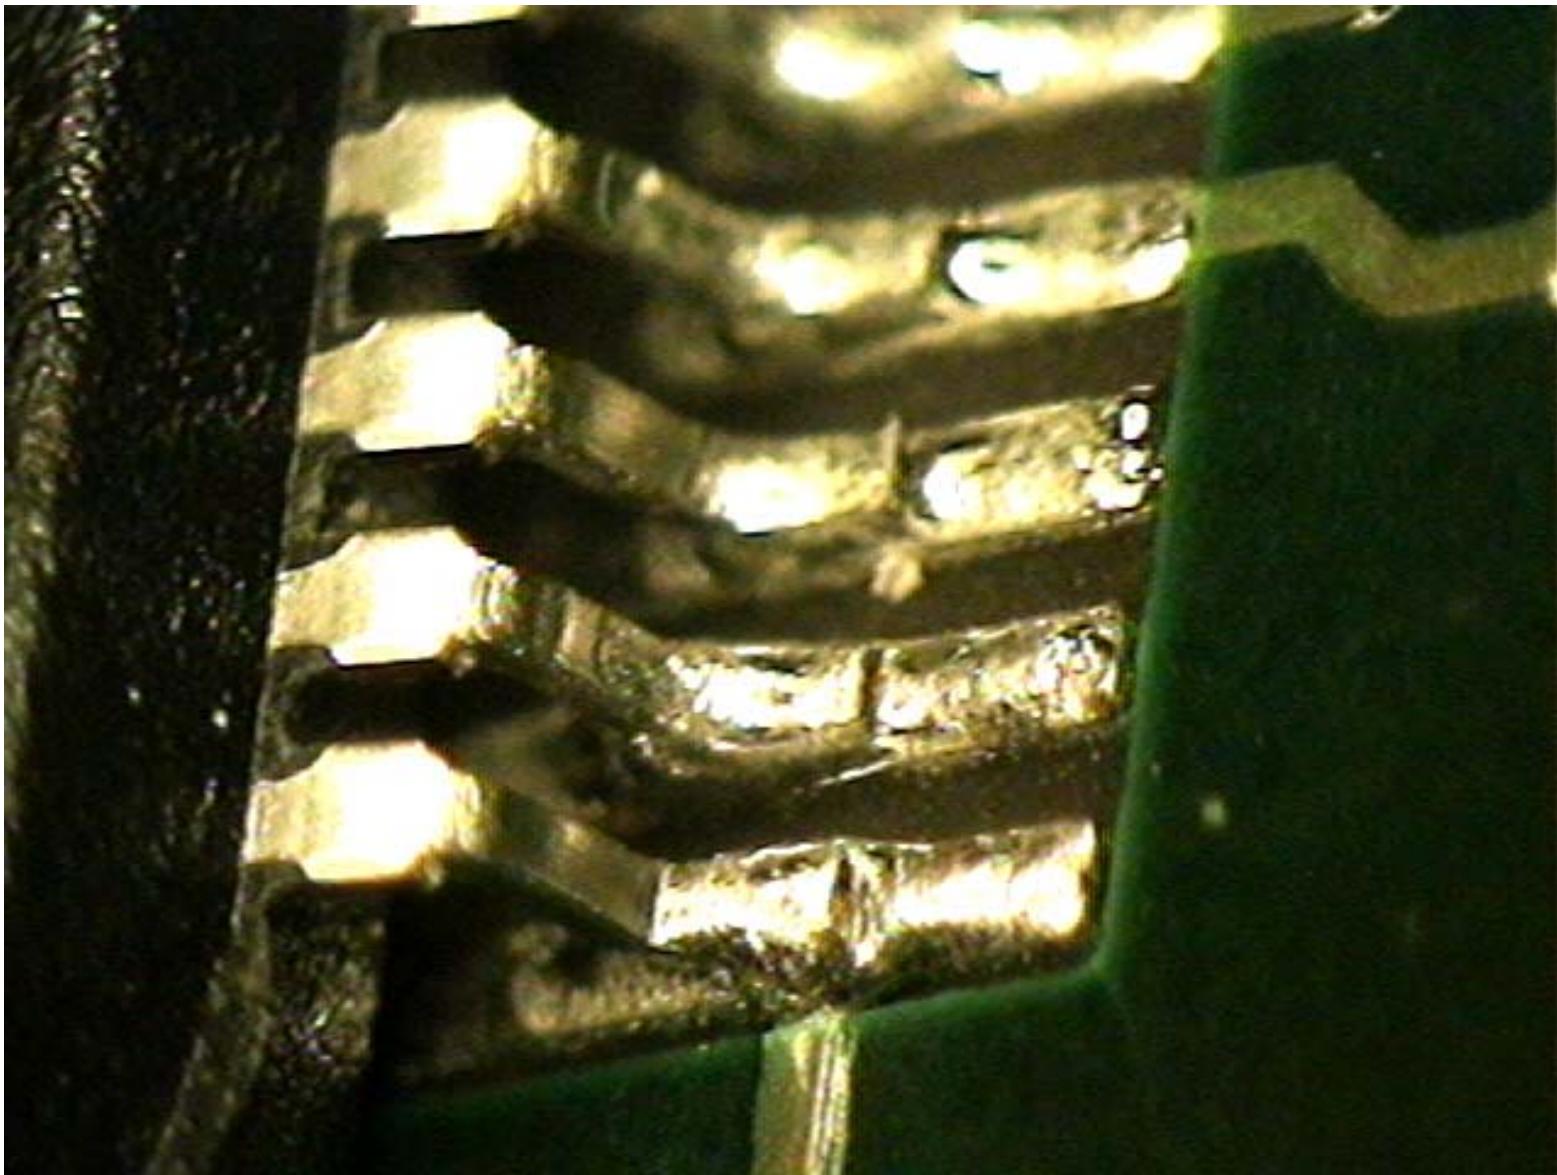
Vehicle ID 52, Reworked TQFP-208 U3, SnPb Solder/NiPdAu Component Finish, 100x
